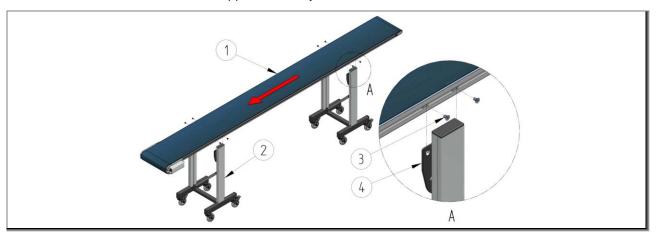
Assembly, conveyor with support HE 060 - HM 590 (typical)
